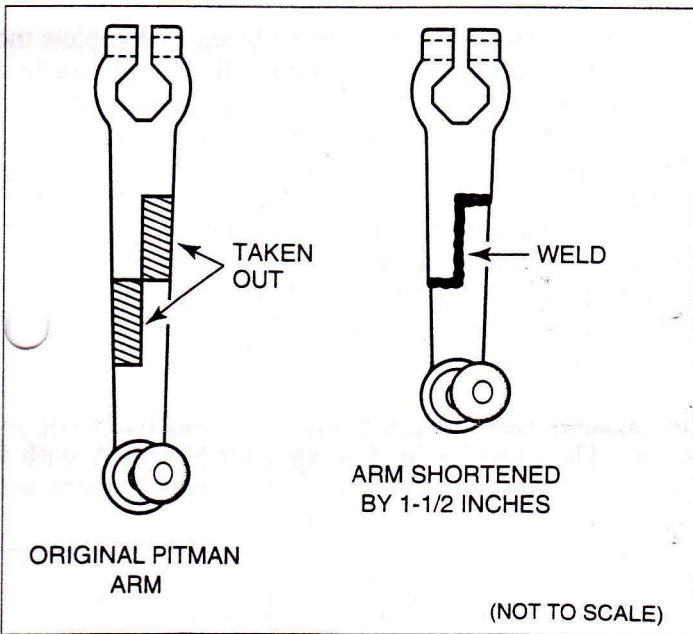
Overlapping arm sections assures a strong weld.
